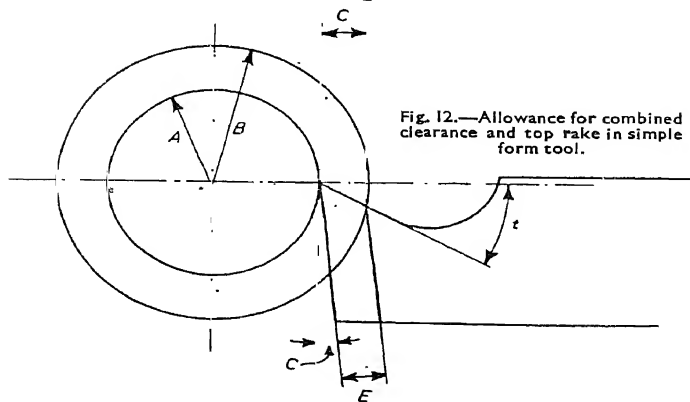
Allowance for combined clearance and top rake in simple form tool.
